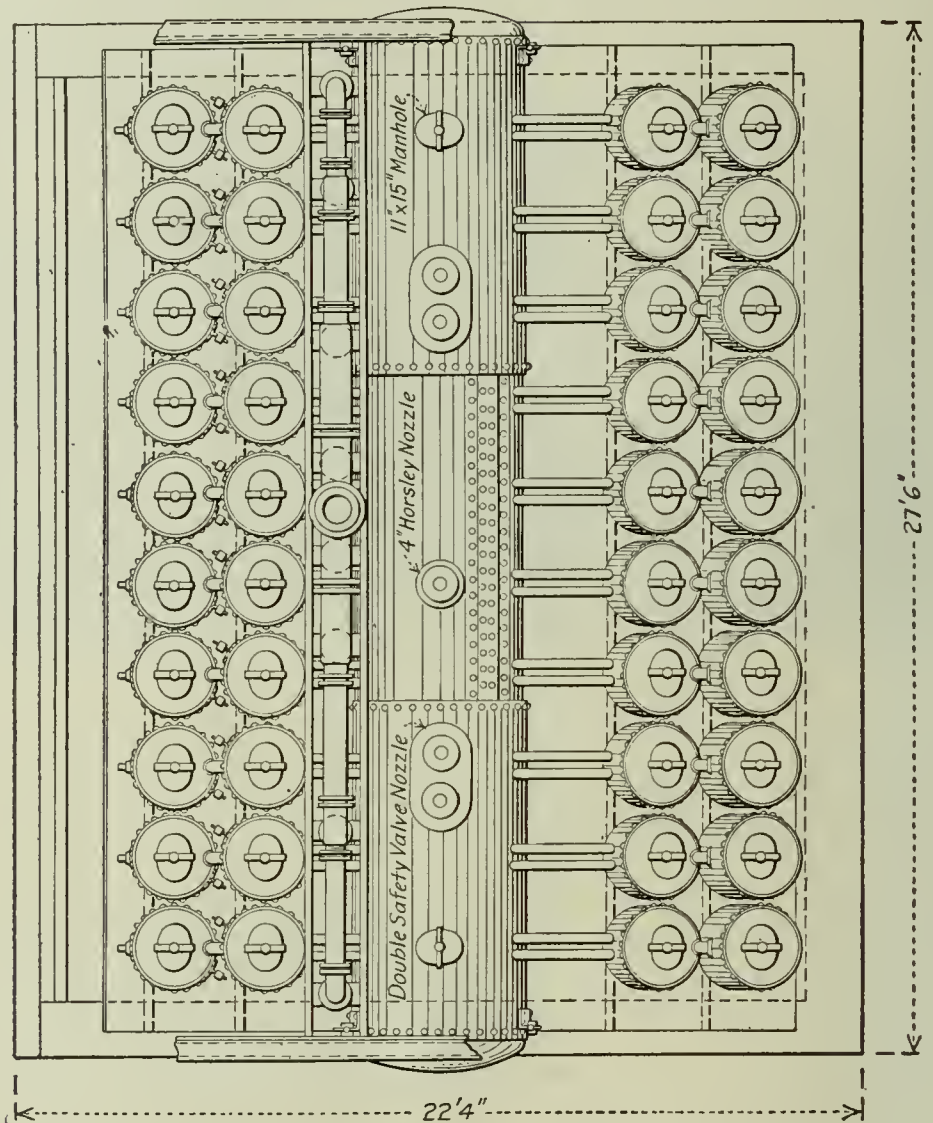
SECTIONAL ELEVATION AND PLAN OF BIGELOW-HORNSBLY BOILER
